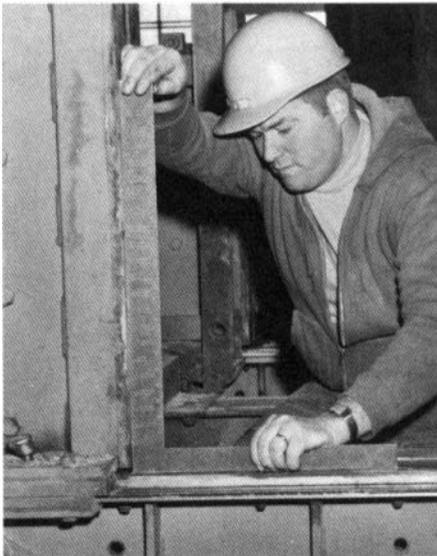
Check the knee and head-block base for a 90-degree angle with a carpenter's square.
